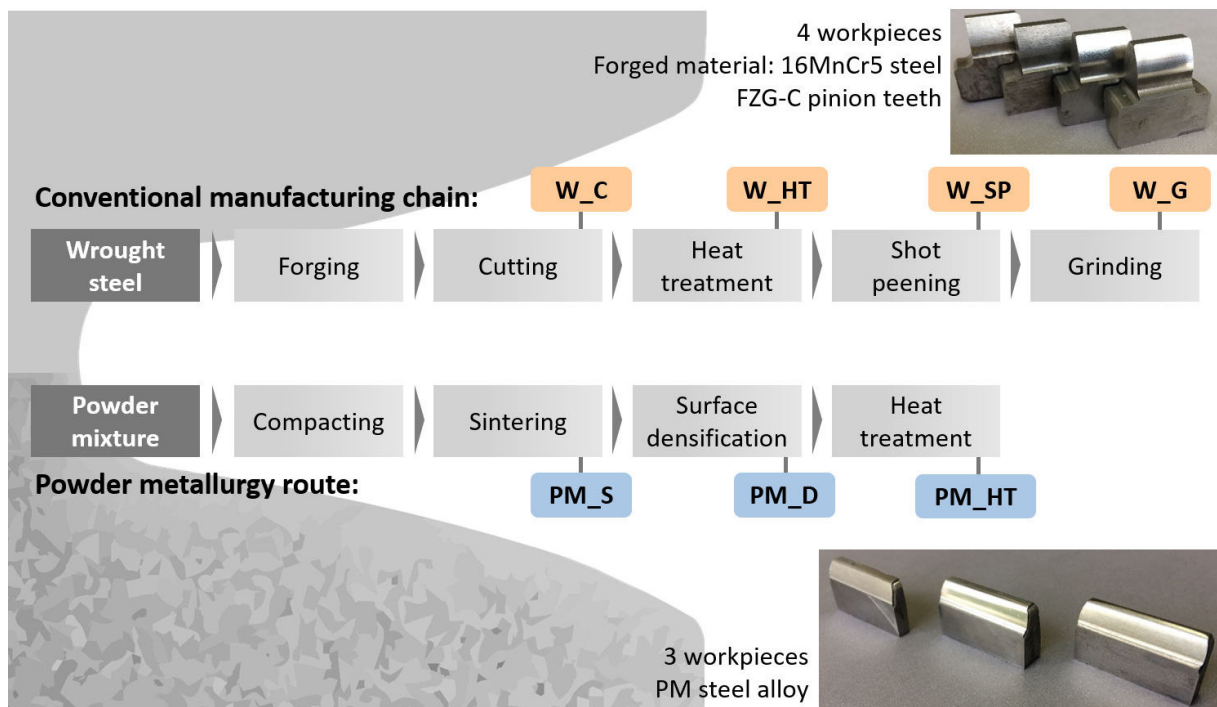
Powder metallurgy and wrought steel gear workpieces
